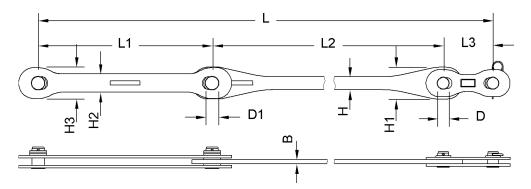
Dimensions of main boom pendant strap on 2821 boom head section
